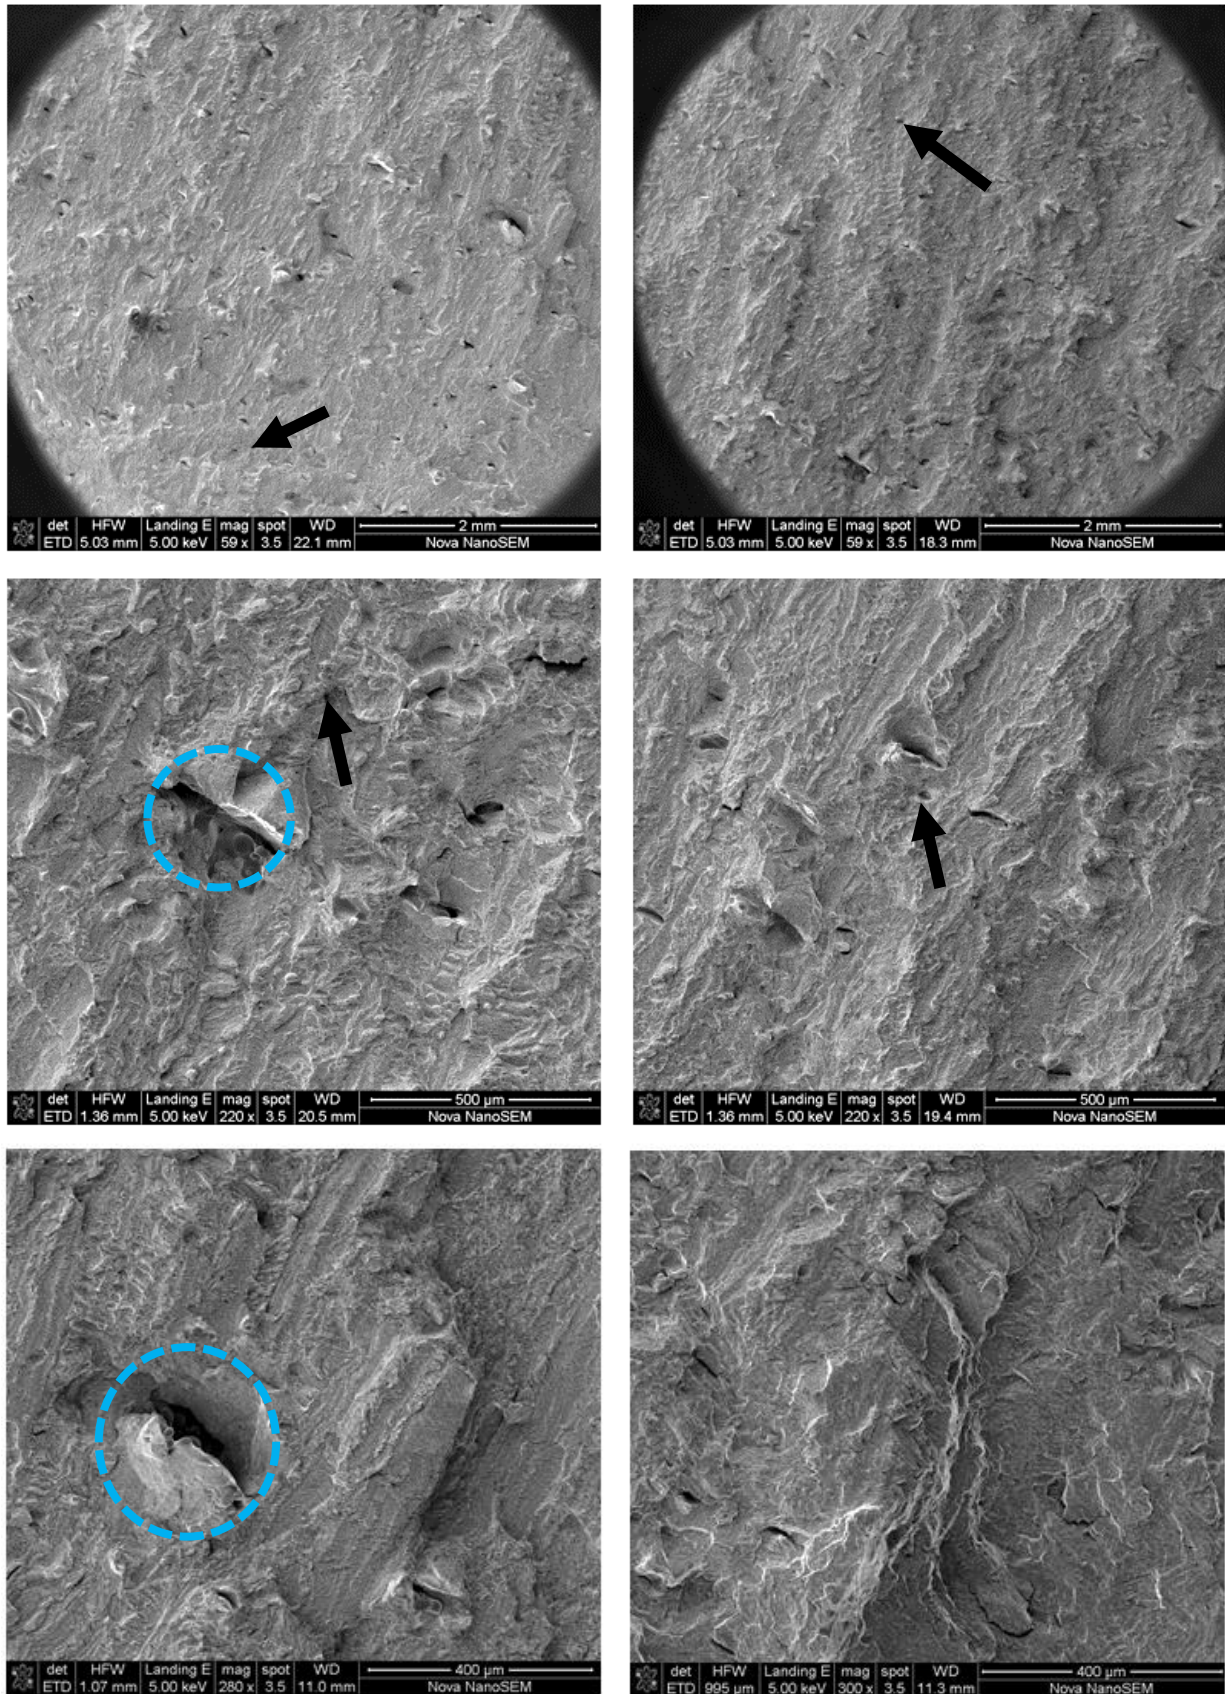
Fractured surfaces of a stressed relieved SLM Ti6Al4V 3-point bend fatigue sample fabricated at 3 m/s (second sample).
